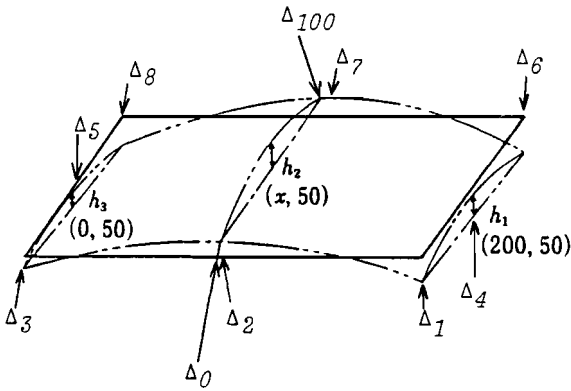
Illustrated view of deformation of workpiece due to bending
